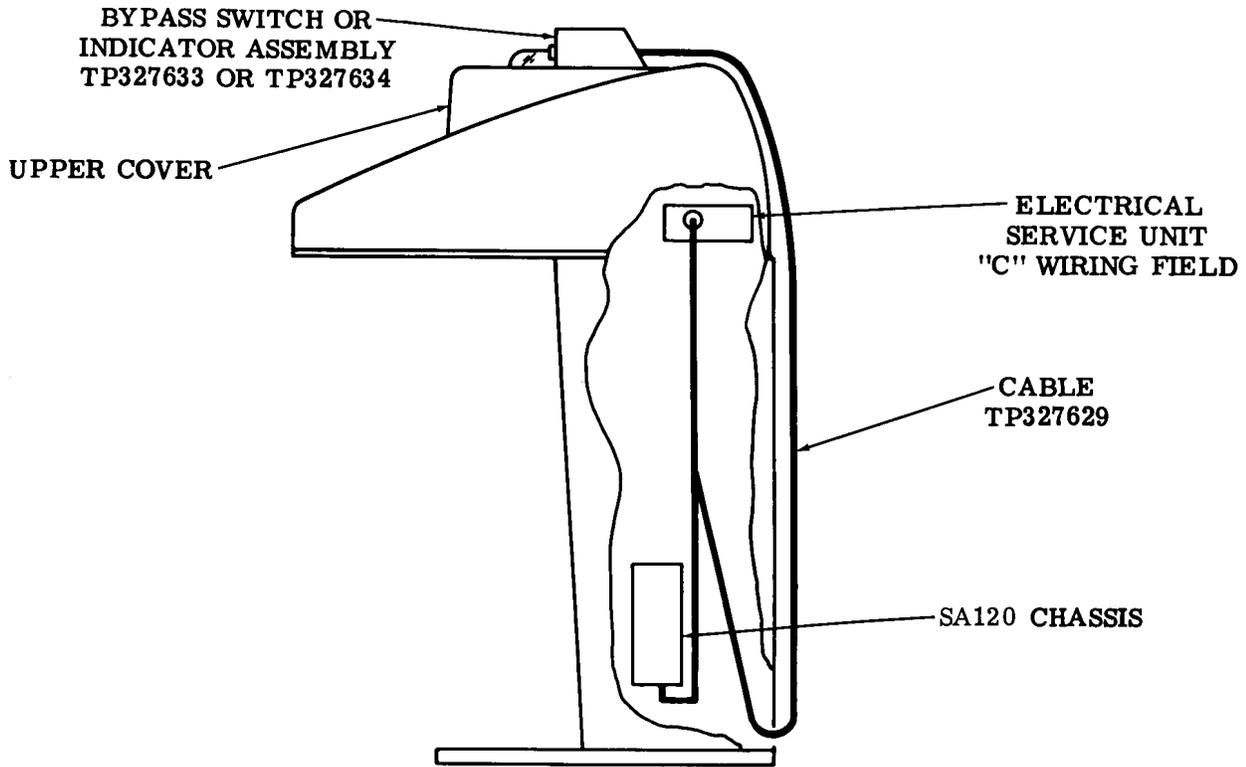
Location of SA120 Chassis and Bypass Switch or Indicator Assembly on 35 Type Set
